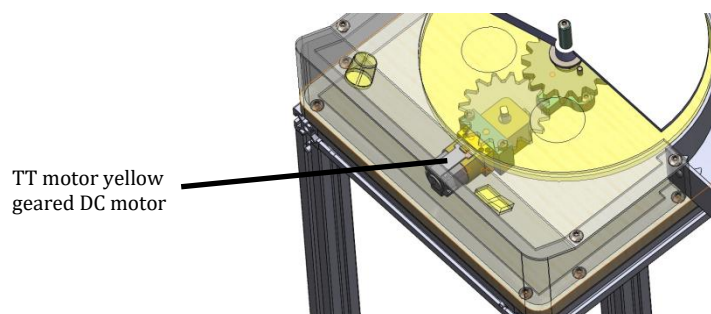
TT motor yellow geared DC motor rotates interconnected gears.
